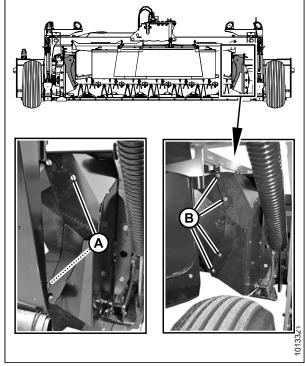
Left-Hand Deflector Shield Shown – Right-Hand Deflector Shield Opposite
